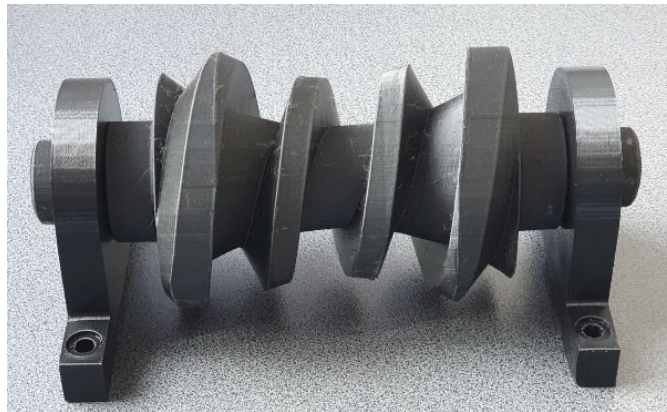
Three-dimensional prototype worm and bearings obtained through additive manufacturing.
